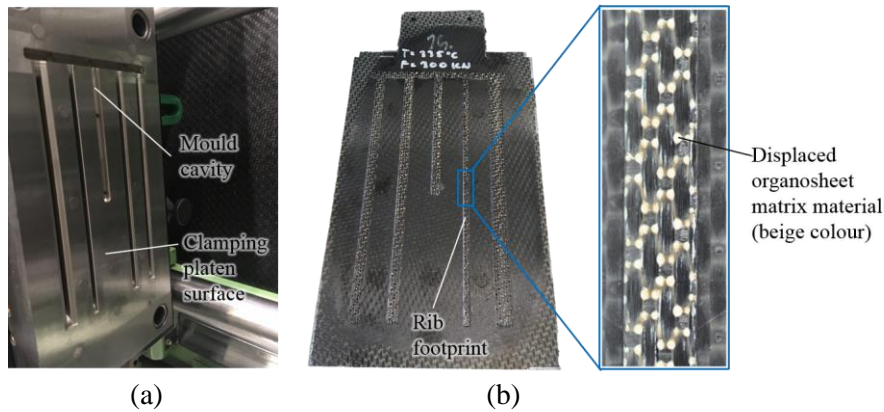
Clamping platen used for manufacturing both ribbed and pressed plates (a). Photograph of rib footprint (b), showing matrix displacement onto surface of pressed plate.
